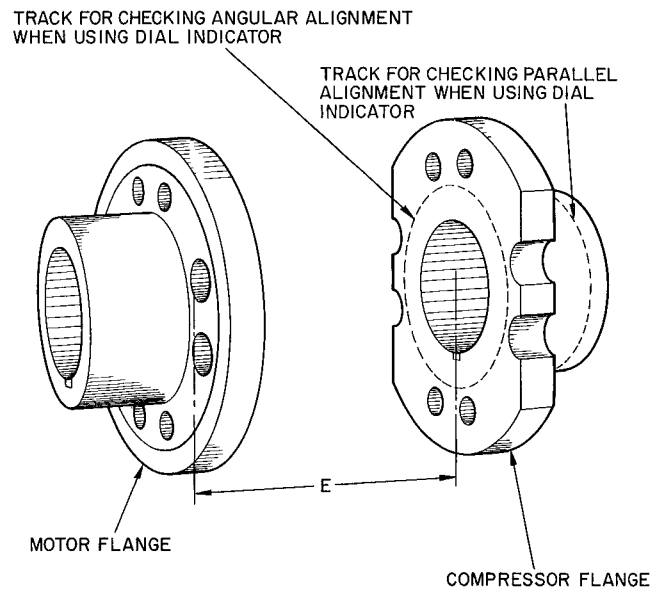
5H80-623 Coupling Alignment Tracks
